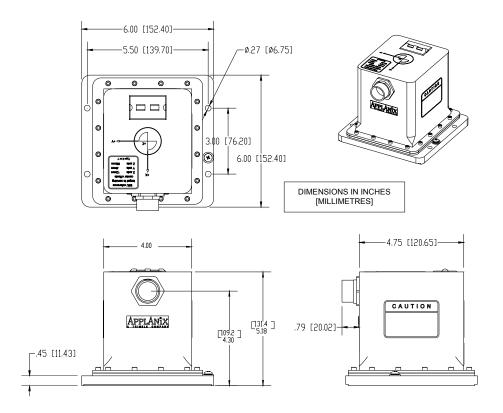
(1 of 2) IMU Type 2 & 7 Outline - Top, Side and Front Views
